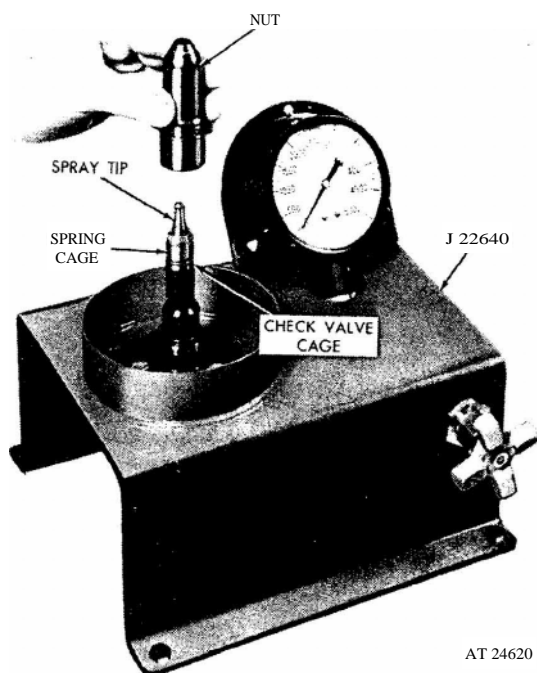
Installing injector valve parts on Auxiliary Tester J 22640.
